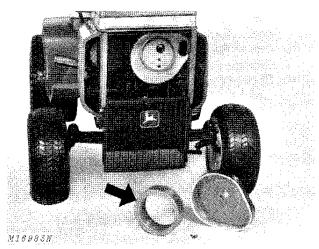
Air Filter Element (210 Tractor Illustrated)
